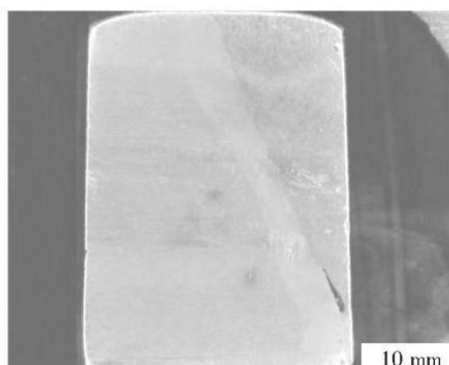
Macrostructure Morphology of Welded Joints Using Process 2 [6]
